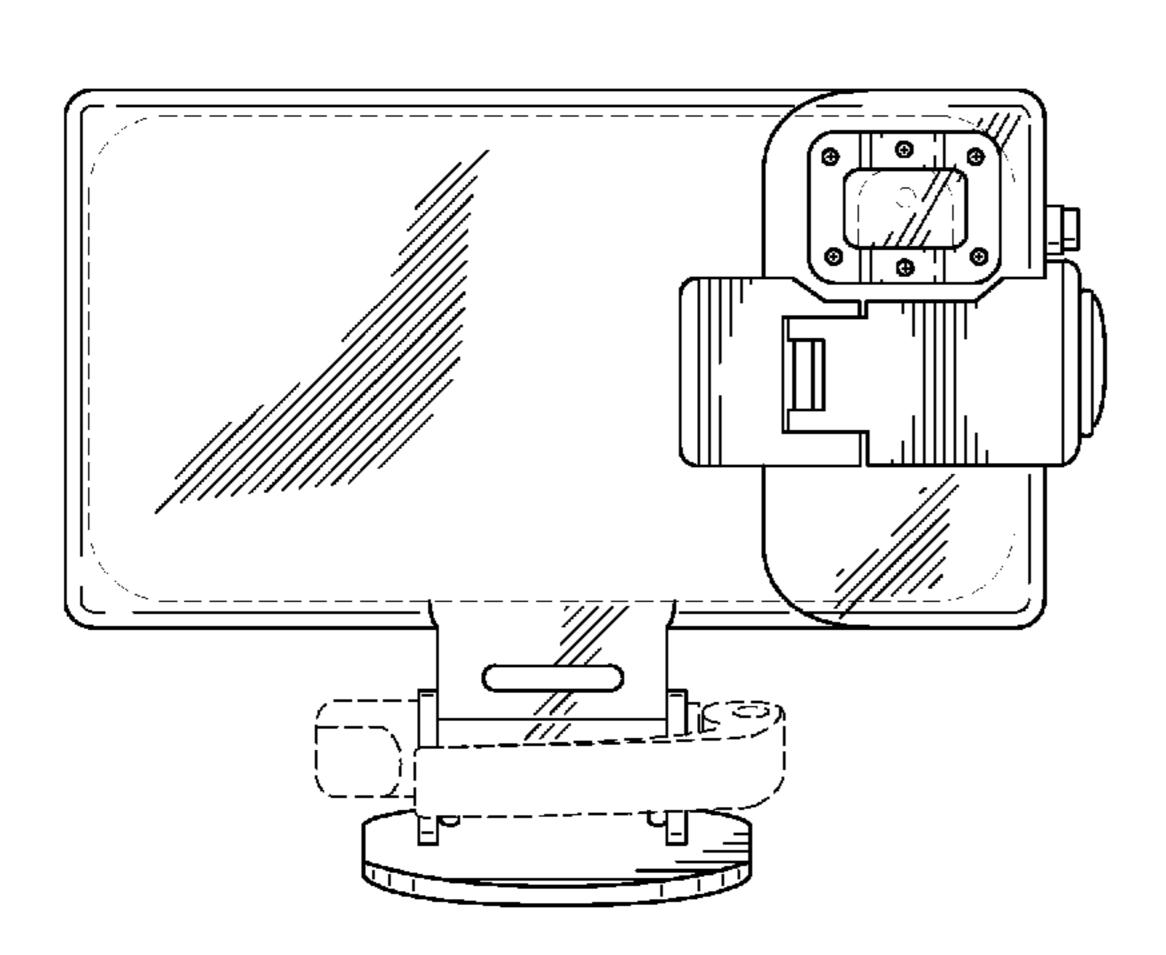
is an exploded back view of FIG. 1; the casing and mounting assembly door ajar;
